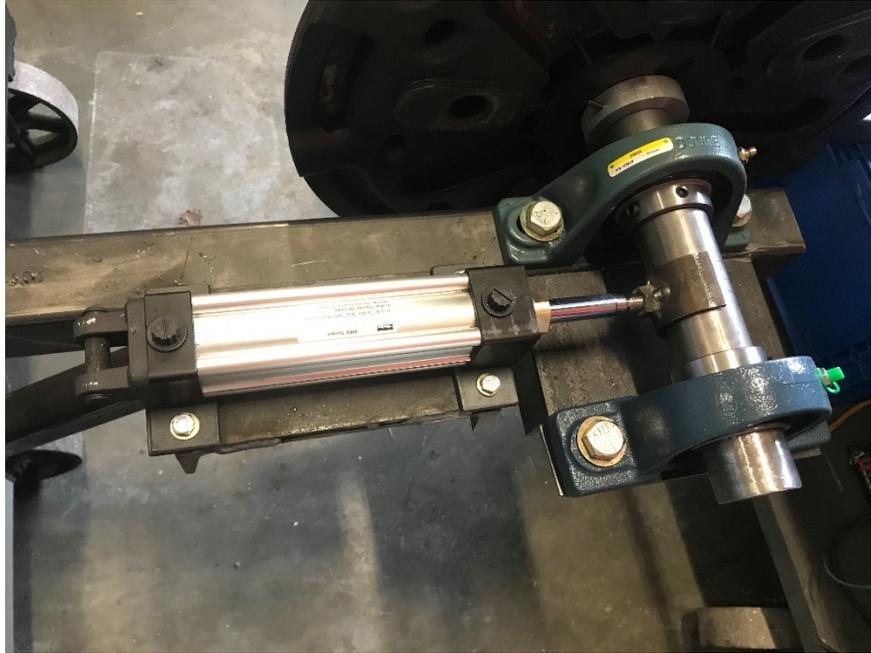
Spool Mount Fabricated with Jam Brake and Bearing.
